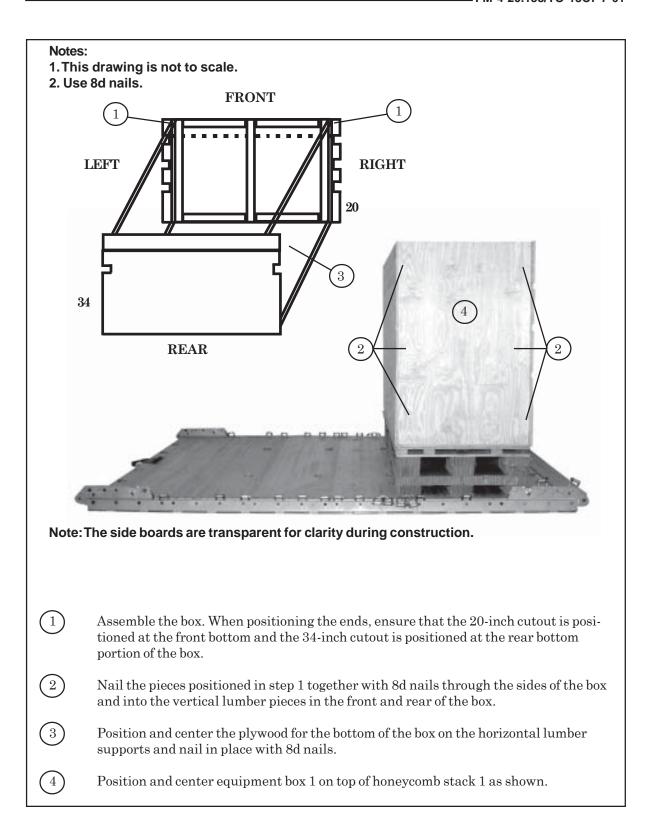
Equipment Box 1 Partially Assembled and Positioned for Loading
